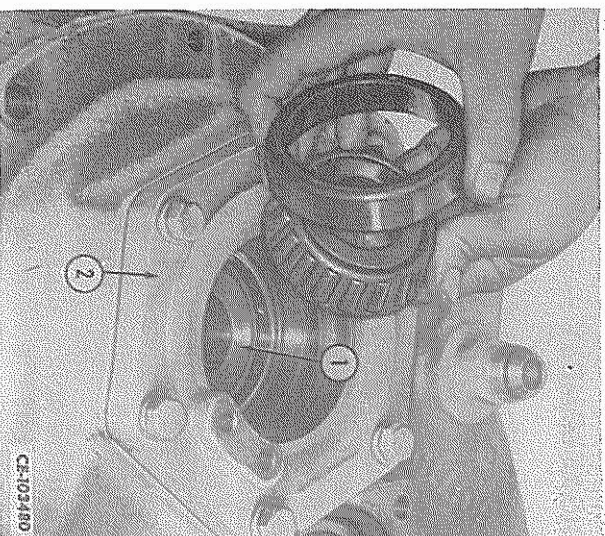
Removing the Pinion Shaft Front Bearing Outer Cup and Cone
